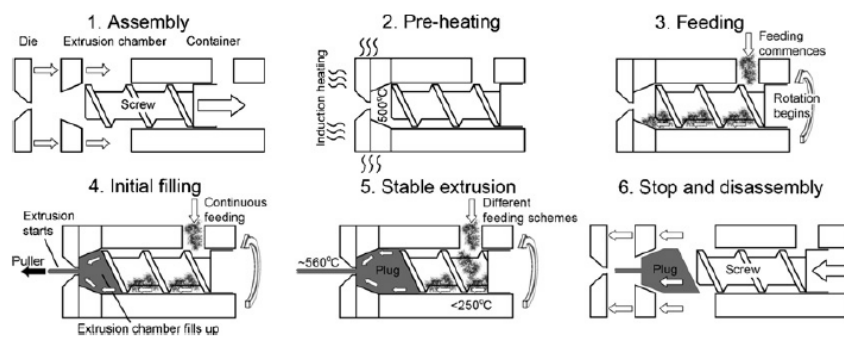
Sketch of screw extrusion procedure steps. From [27].
